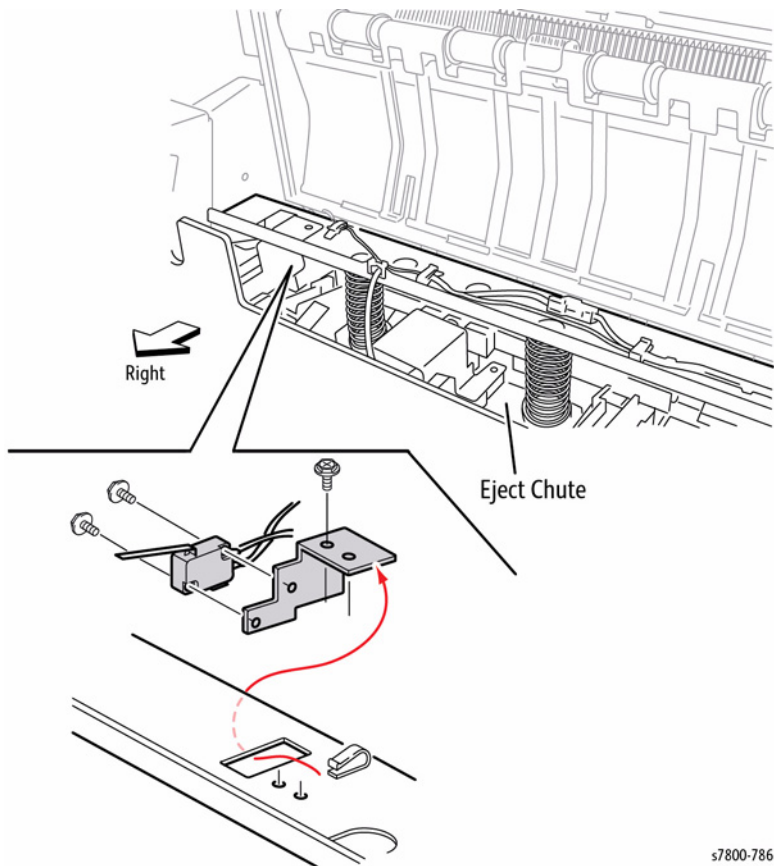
Removing the Eject Cover Switch (Door H Interlock)
